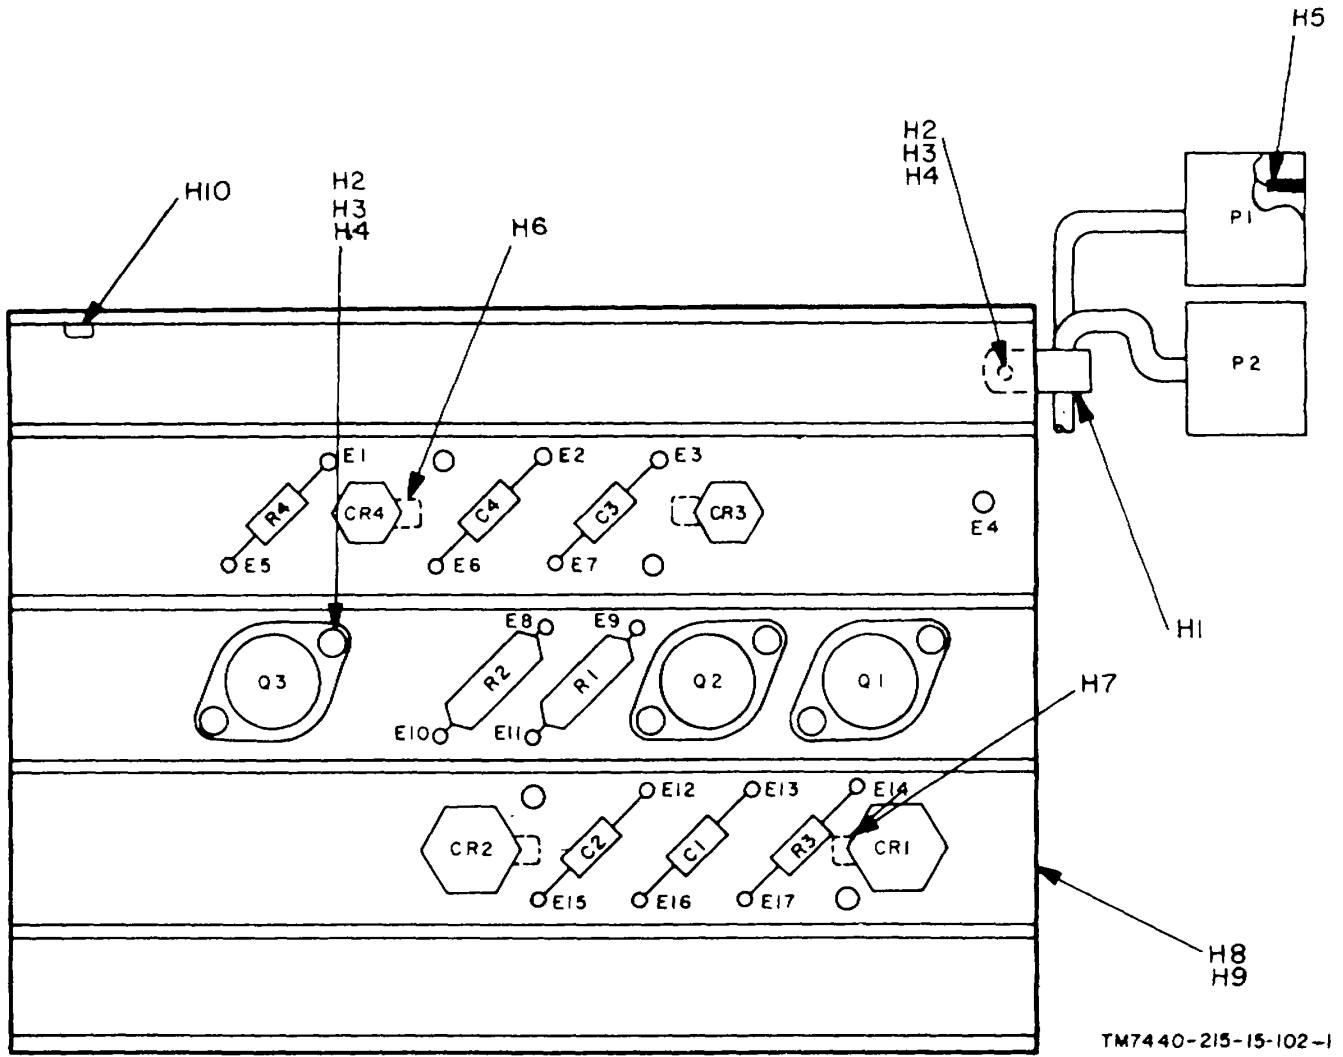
Power supply PS1 heat sink components assembly A4, component locations diagram.
